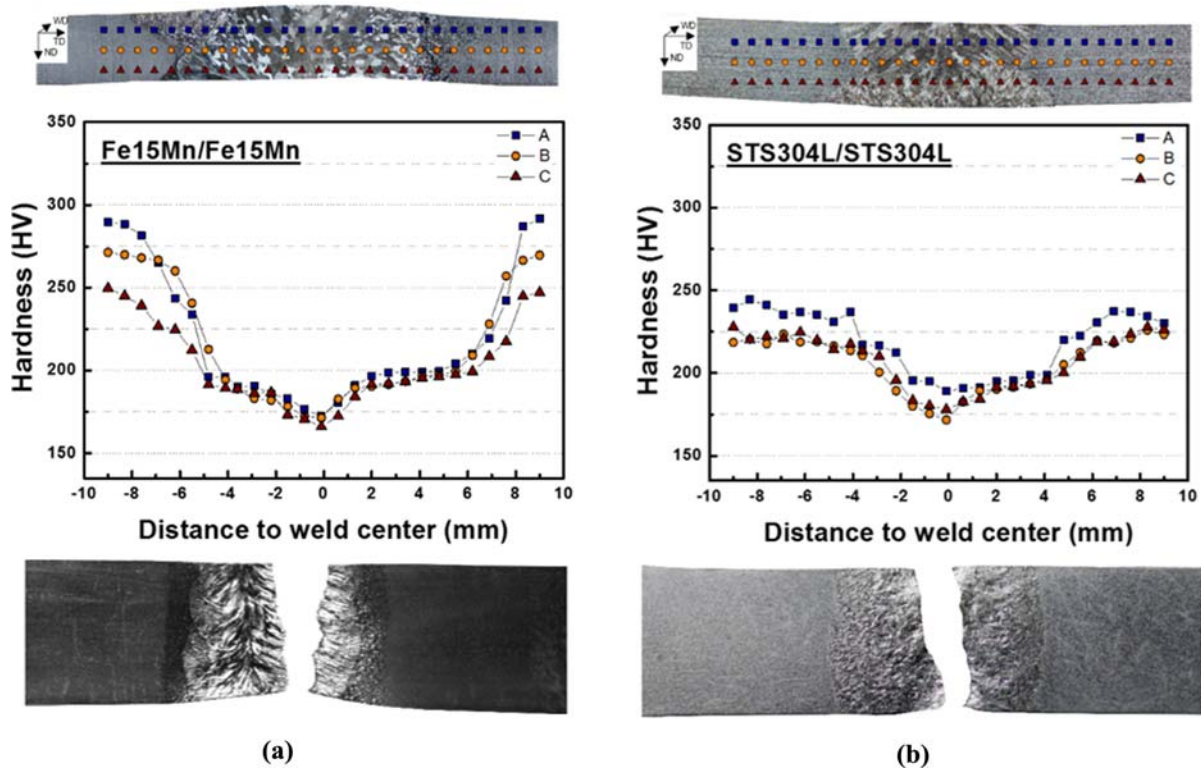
The hardness profile and the location of fatigue failure for the butt-welded joints of (a) Fe15Mn and (b) STS304L specimens.
